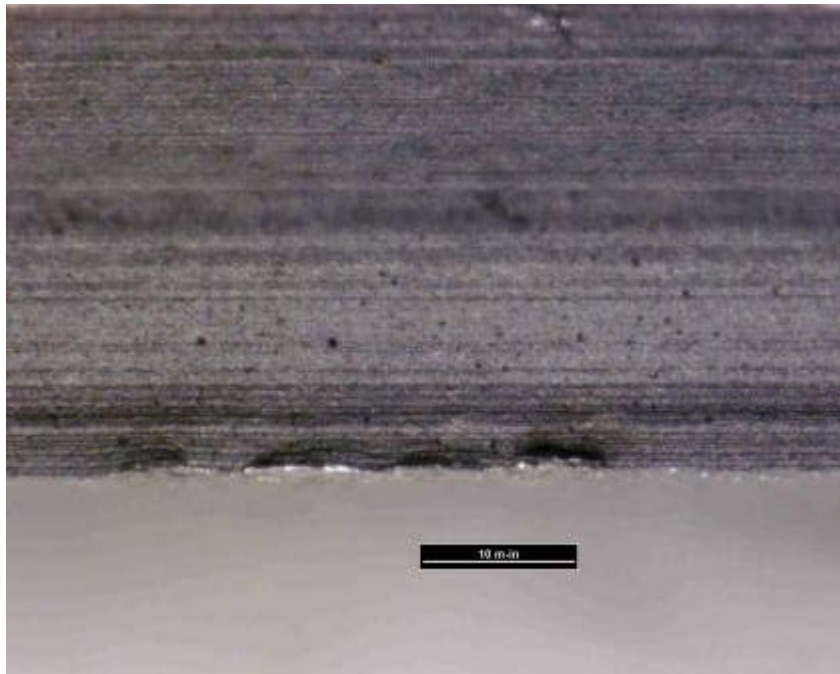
Typical tool marks, tooth root fillet, between teeth 16 and 17.
